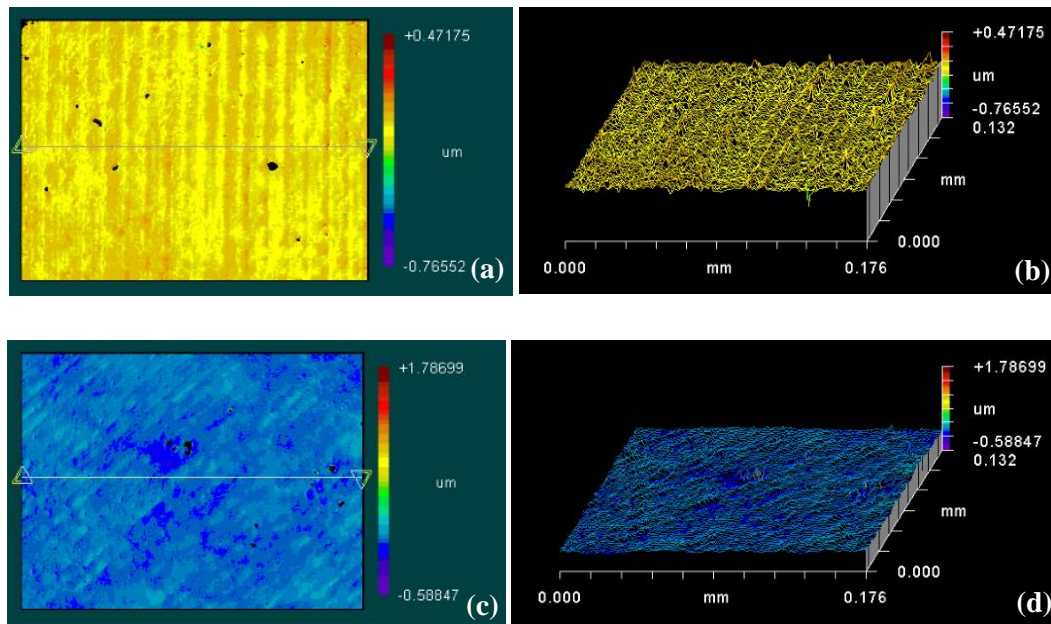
Surface morphology of the machined B_4C/Al MMCs workpiece in micro milling process
